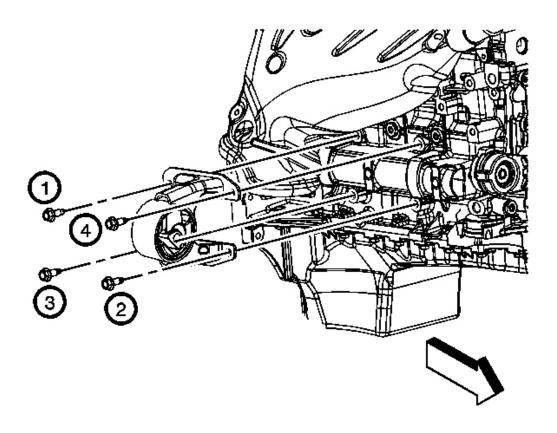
Identifying Engine Mount Courtesy of GENERAL MOTORS CORP.
